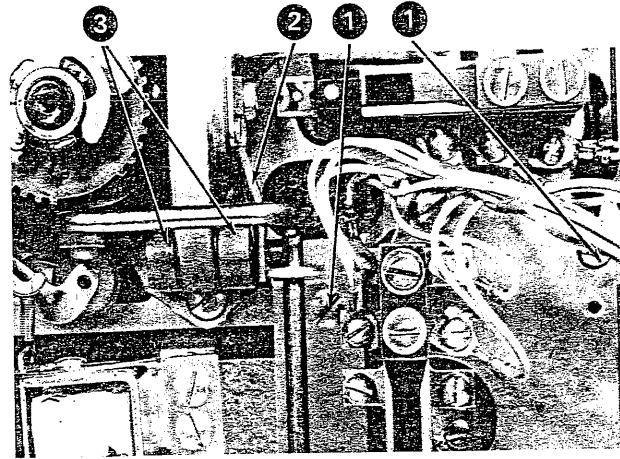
Shift-Arm Removal (Steps 2-4)
